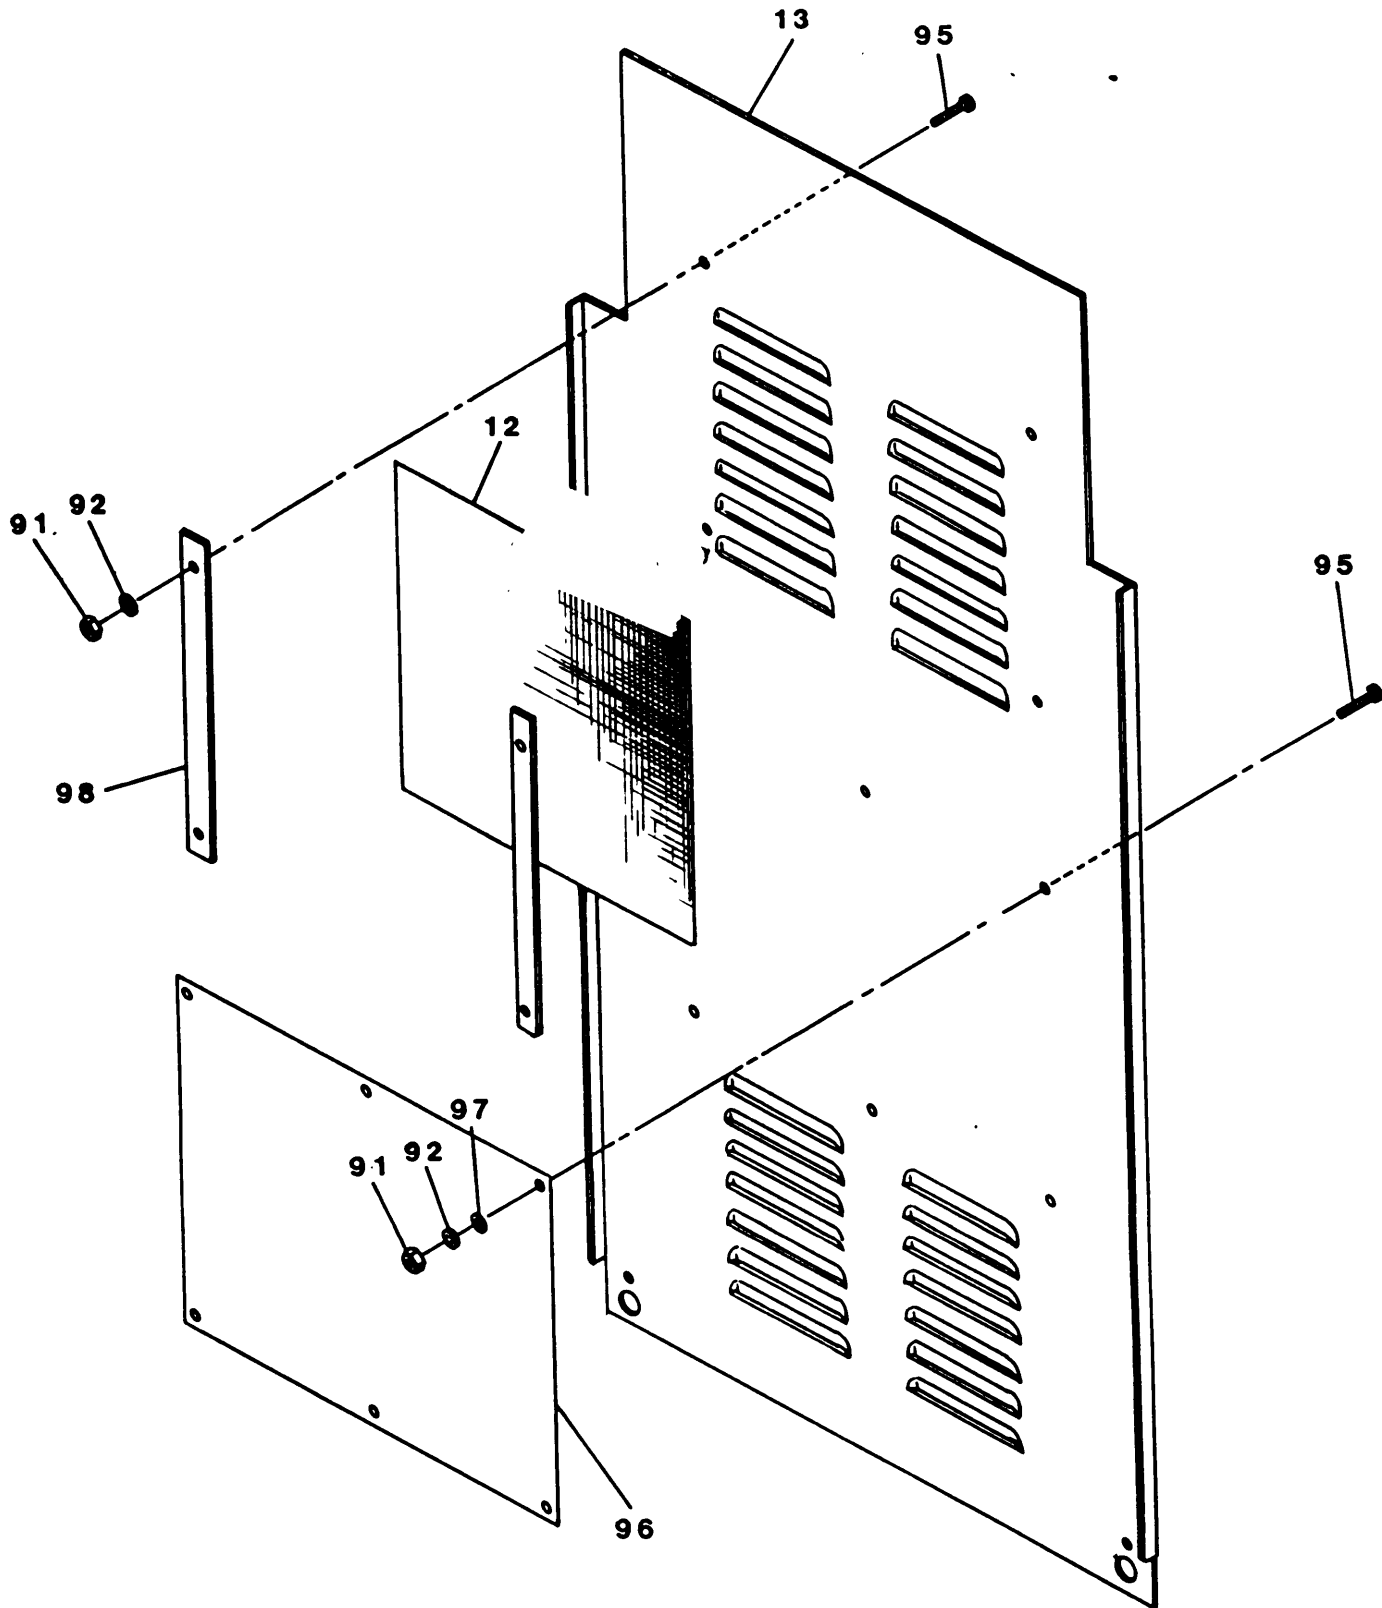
Main Frame Assembly (Sheet 3 of 5)
